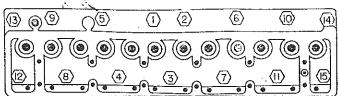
Preliminary tightening sequence on 228, 236, 248, 256, 270, 302 engines
